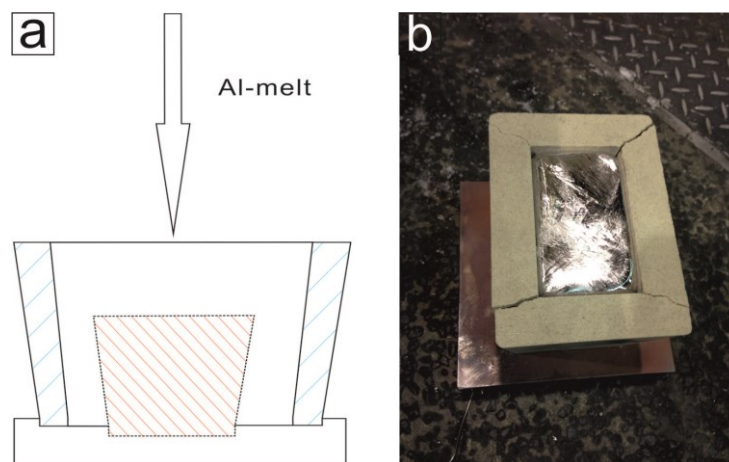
(a) The sketch of pouring Al – melt into fixed inner core and sand mould (b) Al – melt solidified in a sand mould.
